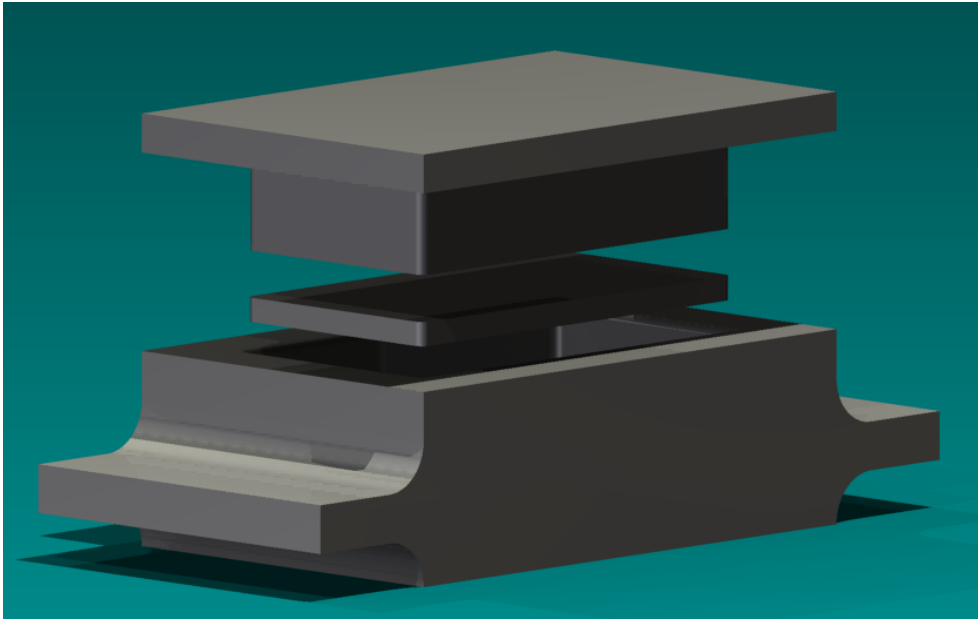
Three dimensional model of the complete assembly of mould 2 (rendered on *Autodesk inventor*)
